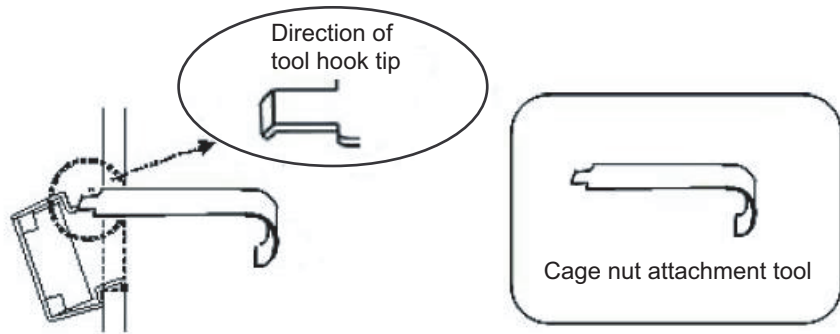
shows a cage nut attached on the lower part of the hole.
